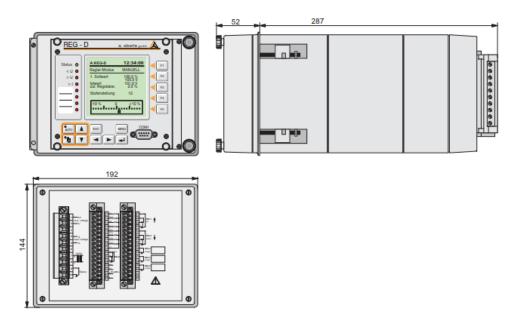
A-Eberle REG-D Panel Mounting Dimensions
